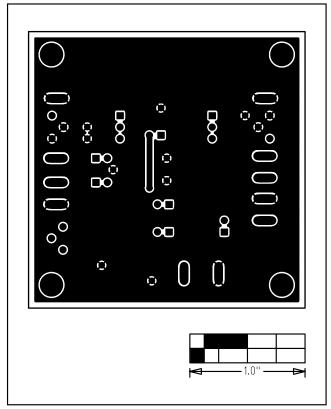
MAX4990 EV Kit PCB Layout—Solder Side
